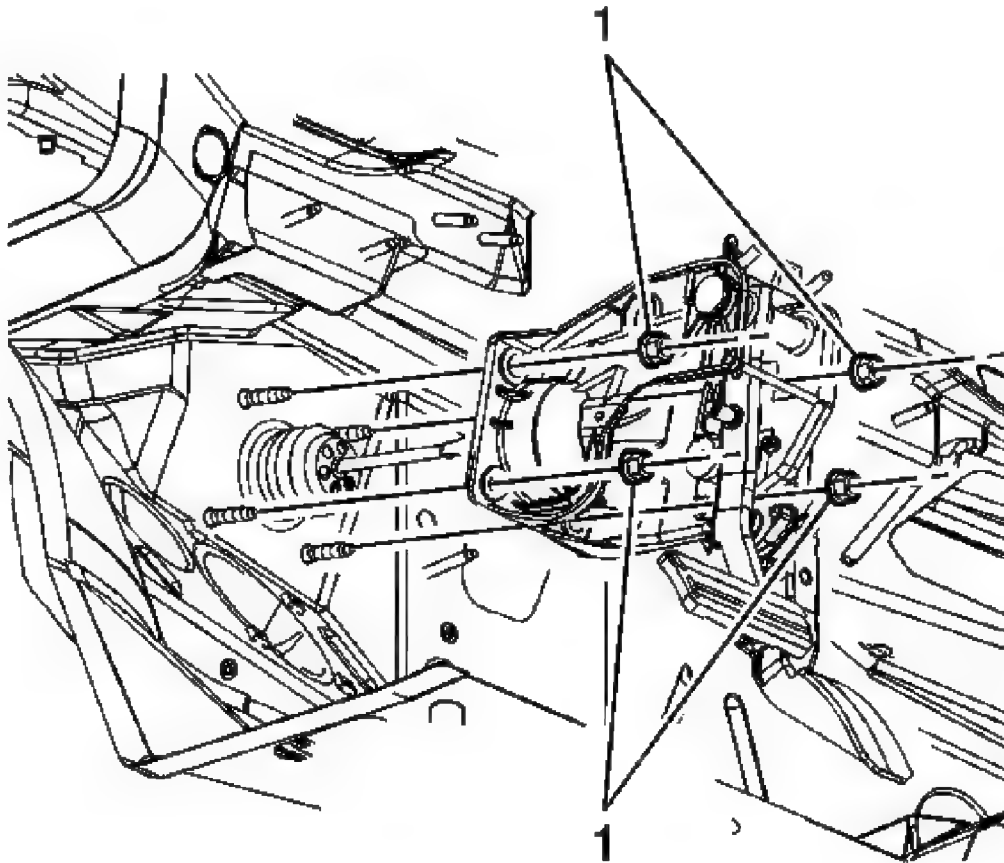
Identifying Vacuum Brake Booster Mounting Nuts
